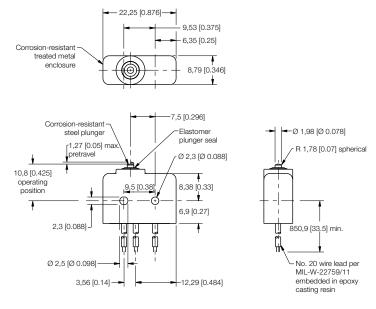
MICRO SWITCH™ SE Dimensions, Solder Terminal
